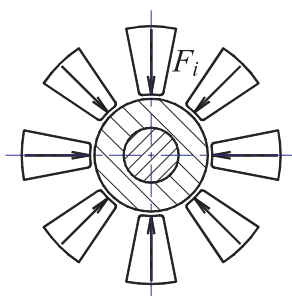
Crimping of cylindrical joint in dies of radial motion
